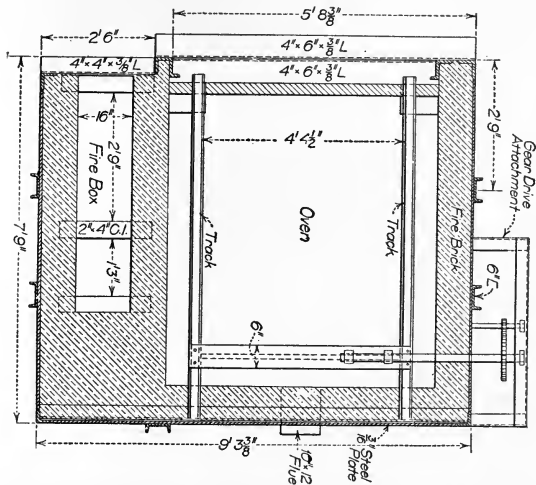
SECTION OF THREE-DRUM COKE BURNING FURNACE TAKEN ABOVE FIREBOX
